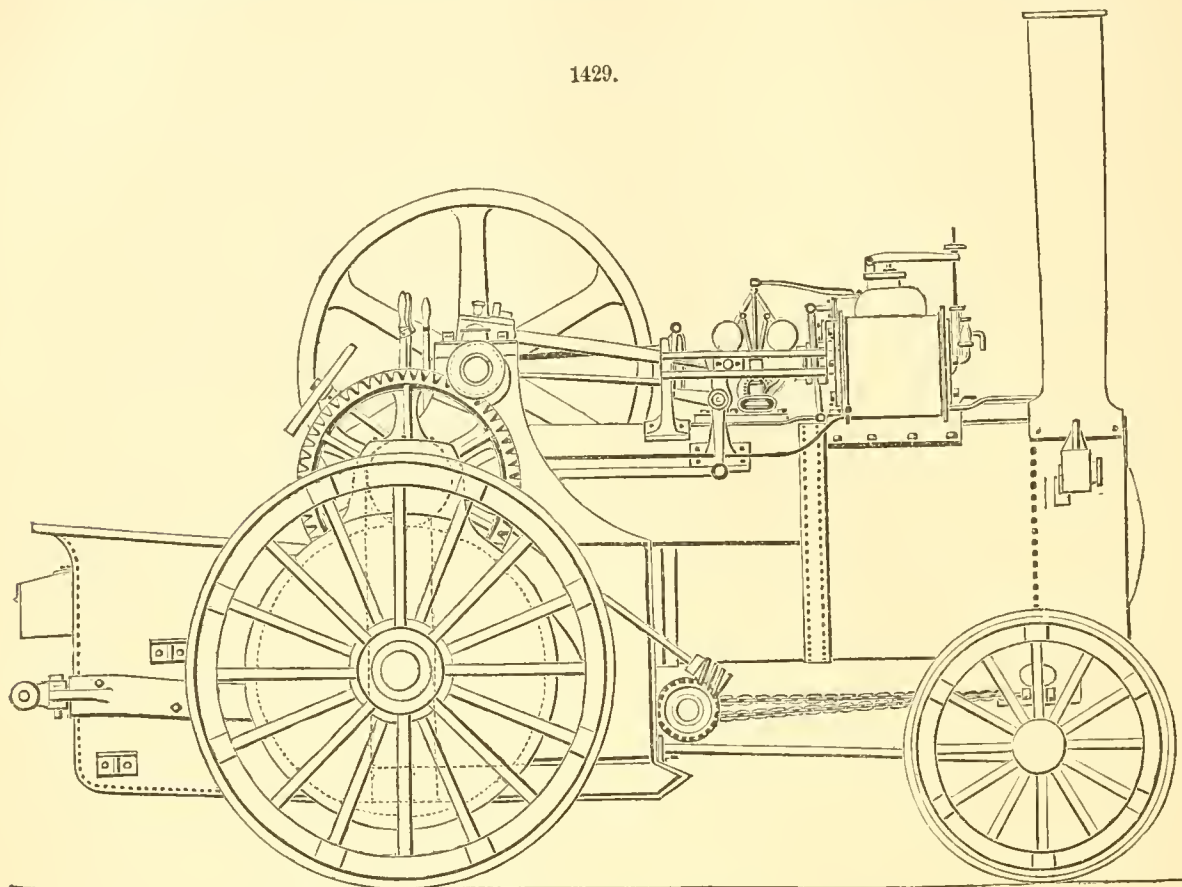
represents an improved form of traction engine or road locomotive built by Messrs. Aveling & Porter of England. The following are the principal dimensions: Weight of engine, com-
